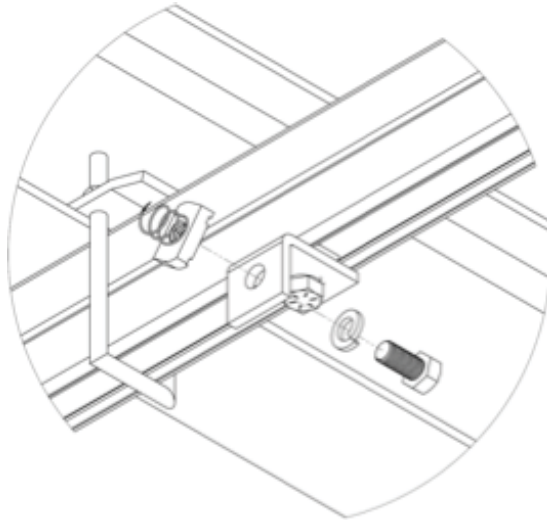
Loosely Thread the Strut Channel Nut on the Bolt with the Spring Facing Away From the 90° Strut Fitting
